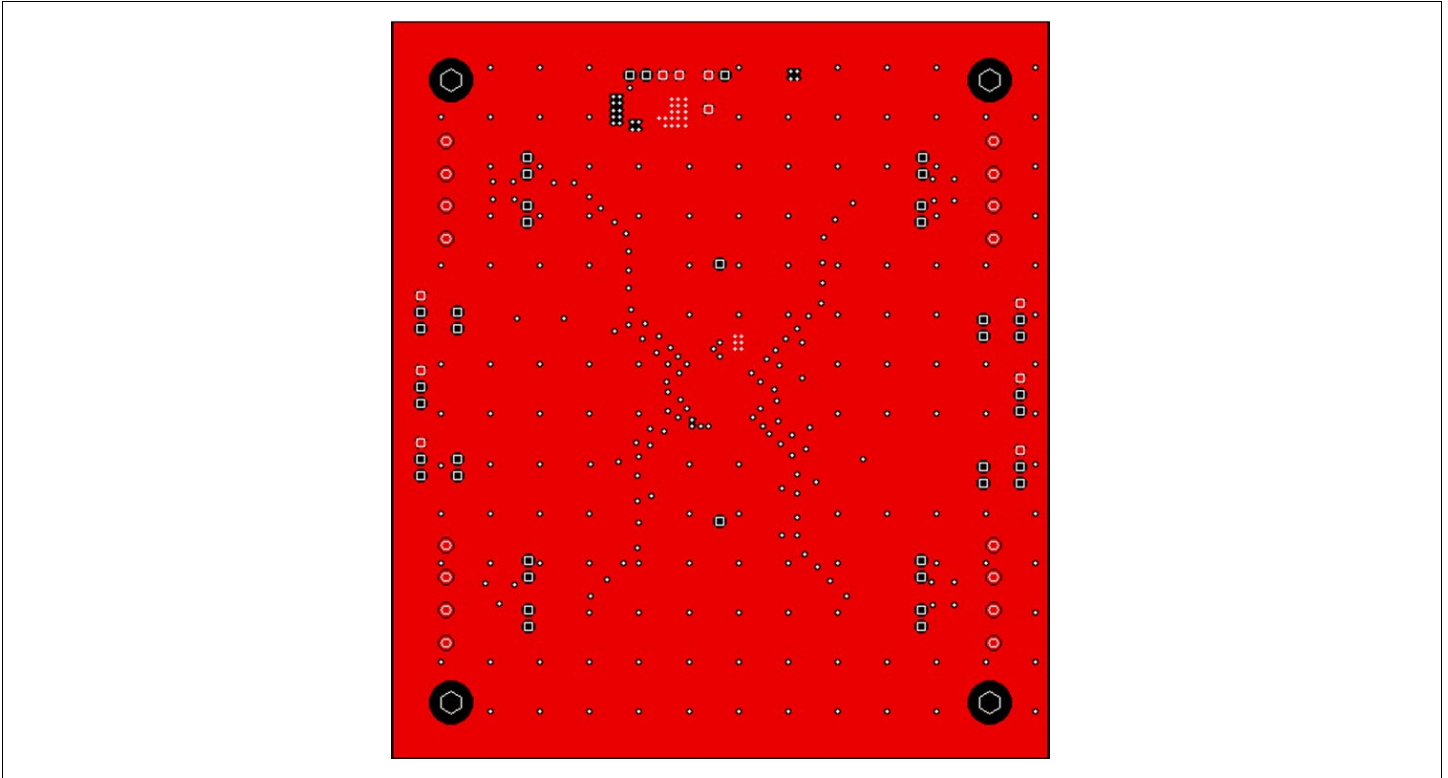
EVK PCB Layer 3—Power Plane (TSSOP16)
